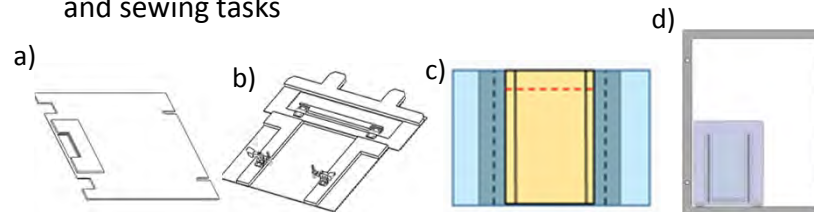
a) Double Hem Prototype b) Velcro Fixture, c) Side hem folding for ironing, Sliding plate and Guided sewing bars
